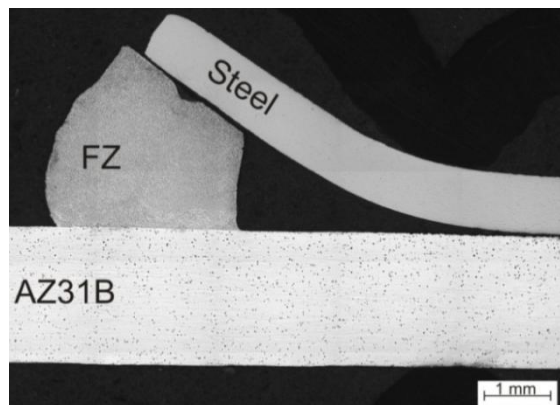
Cross sectional view of laser brazed AZ31B to bare steel sheets made using 8 mm/s travel speed and 2.2 kW laser beam power.
